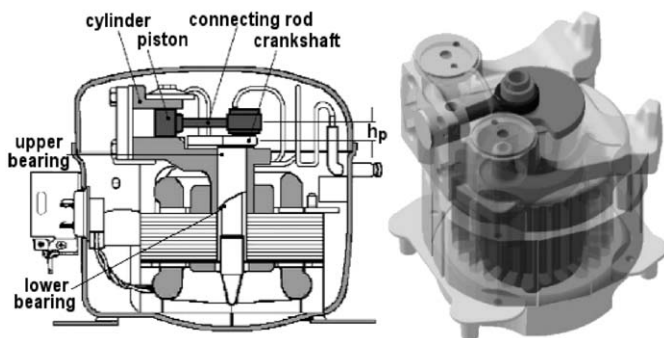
Schematic draw and general view of a hermetic reciprocating compressor.
